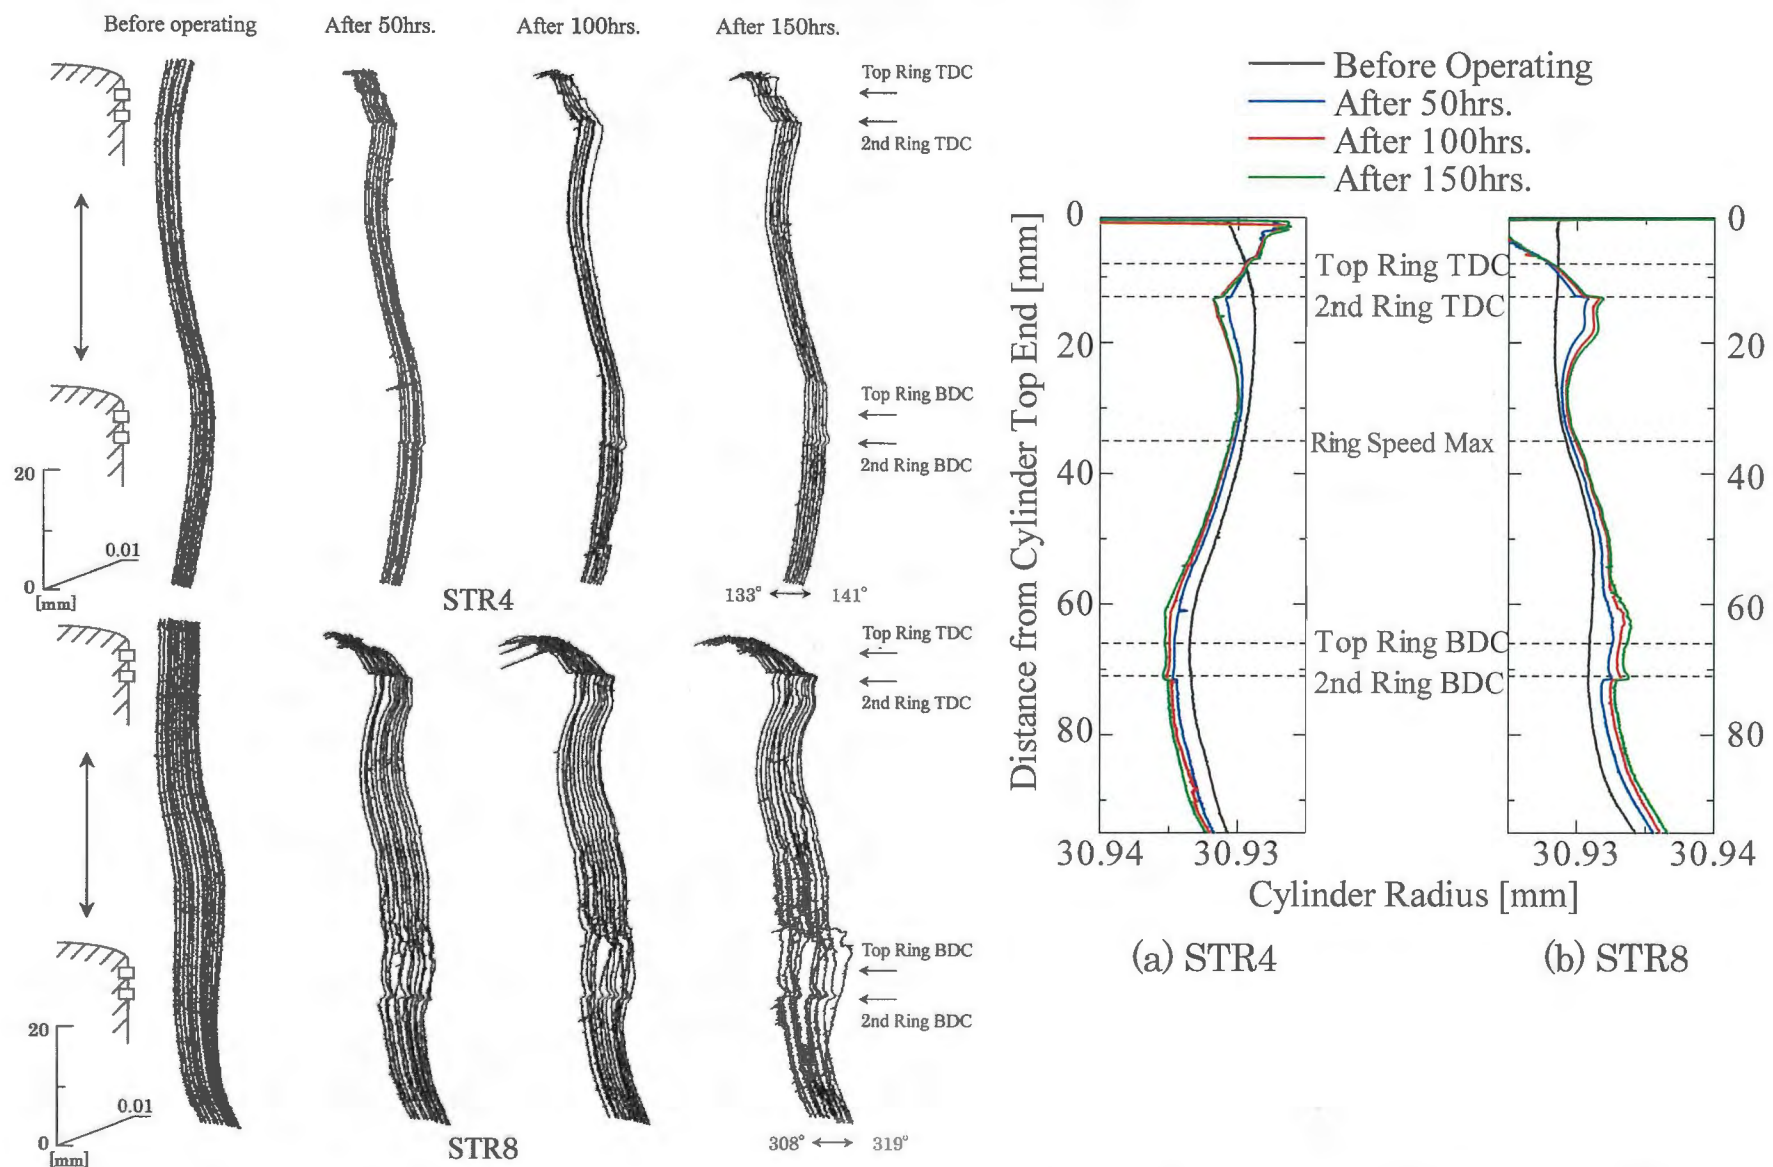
(d) The three dimensional and plane form of cylinder M2 at STR4 and STR8 102
